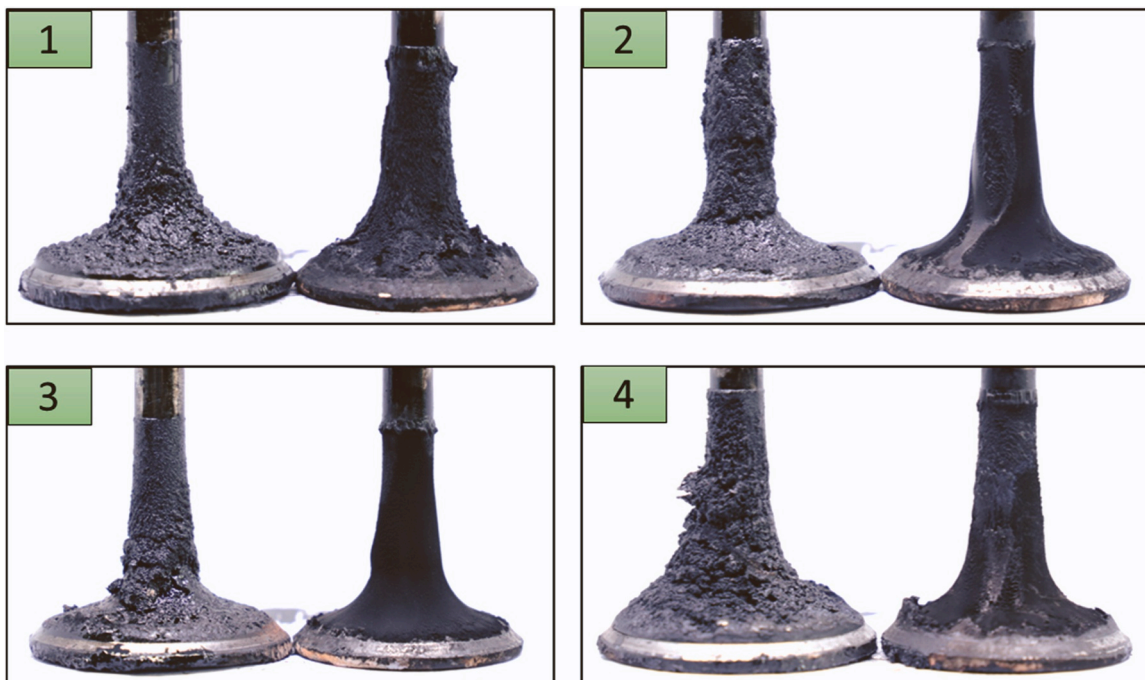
The condition of intake valve and exhaust valve of the CPO#1 engine after 500 operational hours.
